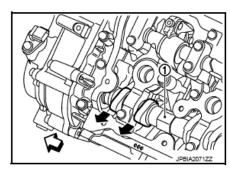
Locating Exhaust Cam Nose On No. 1 Cylinder Courtesy of NISSAN MOTOR CO., U.S.A.
